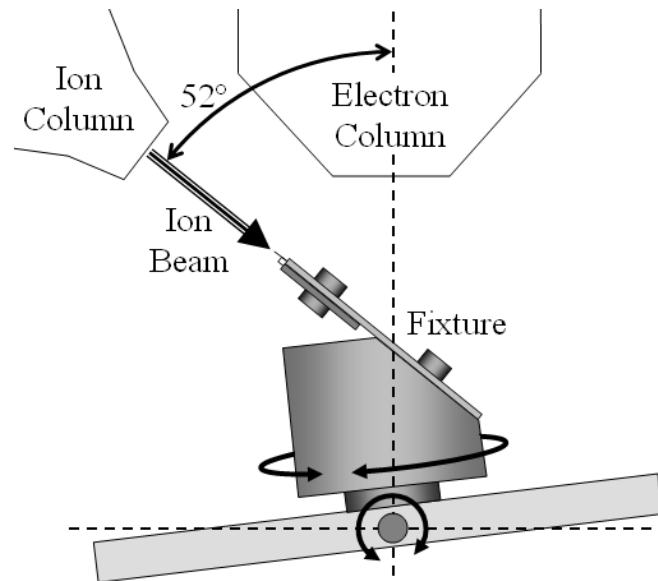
Arrangement of fixture inside FEI Dual Beam 235 FIB during tool fabrication
